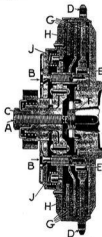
Section of Clutch; Adjusting Screw for Tension at A and Lock Nut at C.
